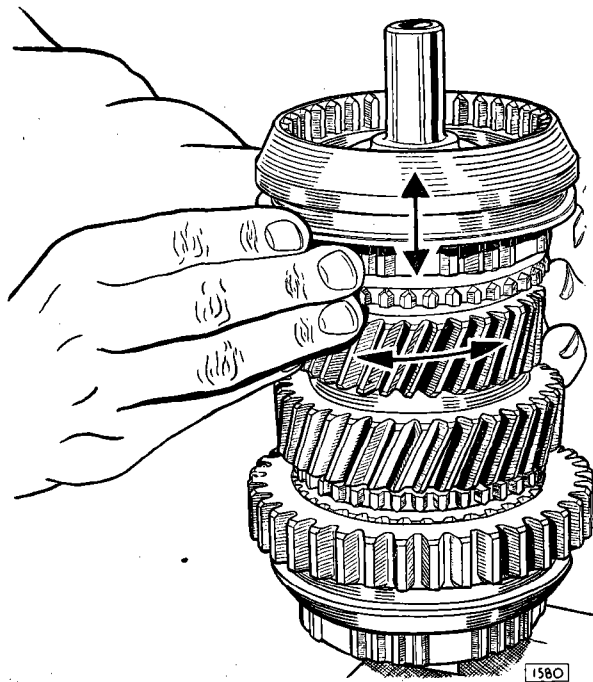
Checking the 4th (top) gear interlock plunger. With the top gear engaged there should be approximately $\frac{3}{16}$ " (4.76 mm.) axial movement without any drag. With top gear still engaged and with slight downward pressure exerted on synchro assembly the 3rd speed gear should be free to rotate.
